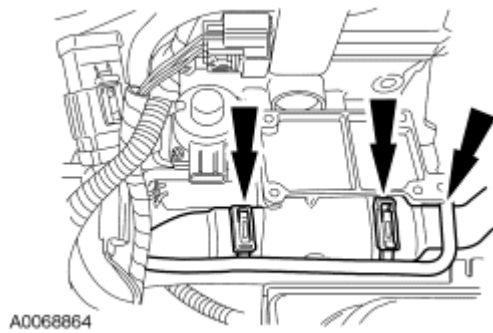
Locating Upper Radiator Hose, Heater Hose And Coolant Vent Hose
